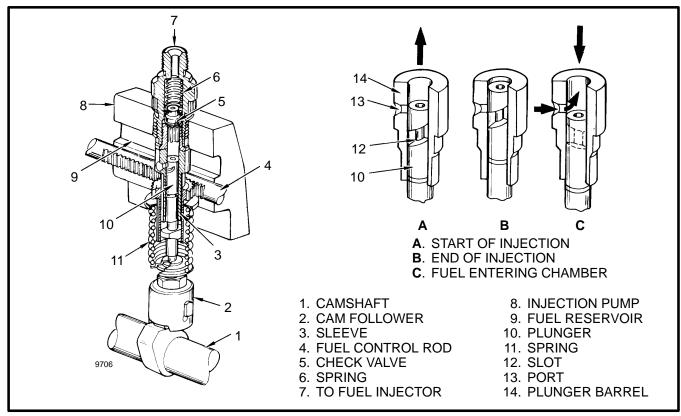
PLUNGER ASSEMBLY, FUEL INJECTION PUMP, MODEL PE4A
